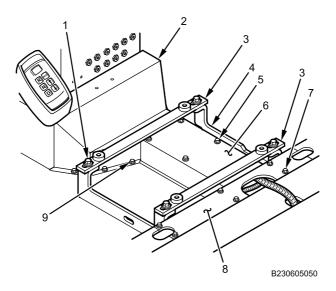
Electrical Harness Storage Duct Center Rear Cover.
